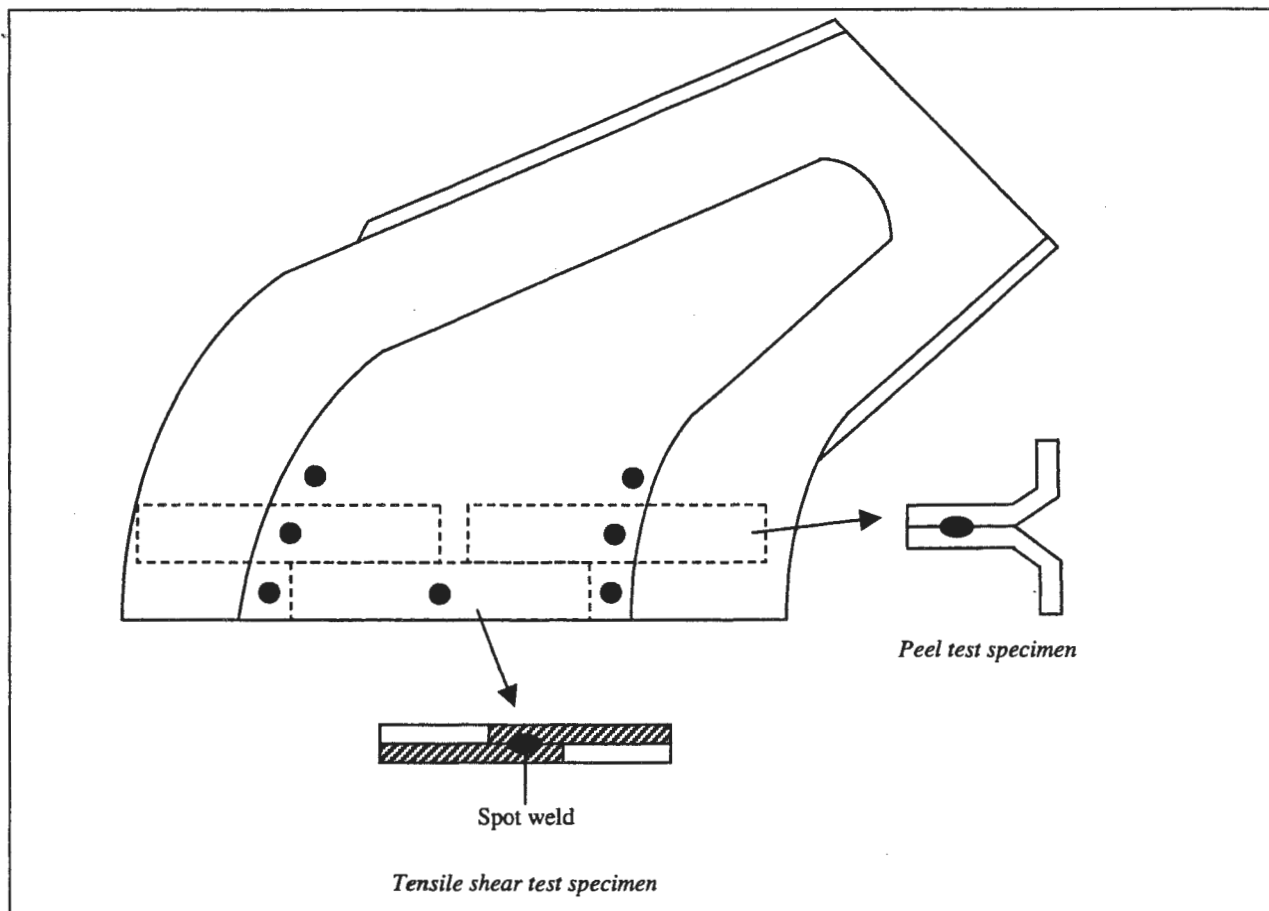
Method of sectioning for spot weld specimens.
